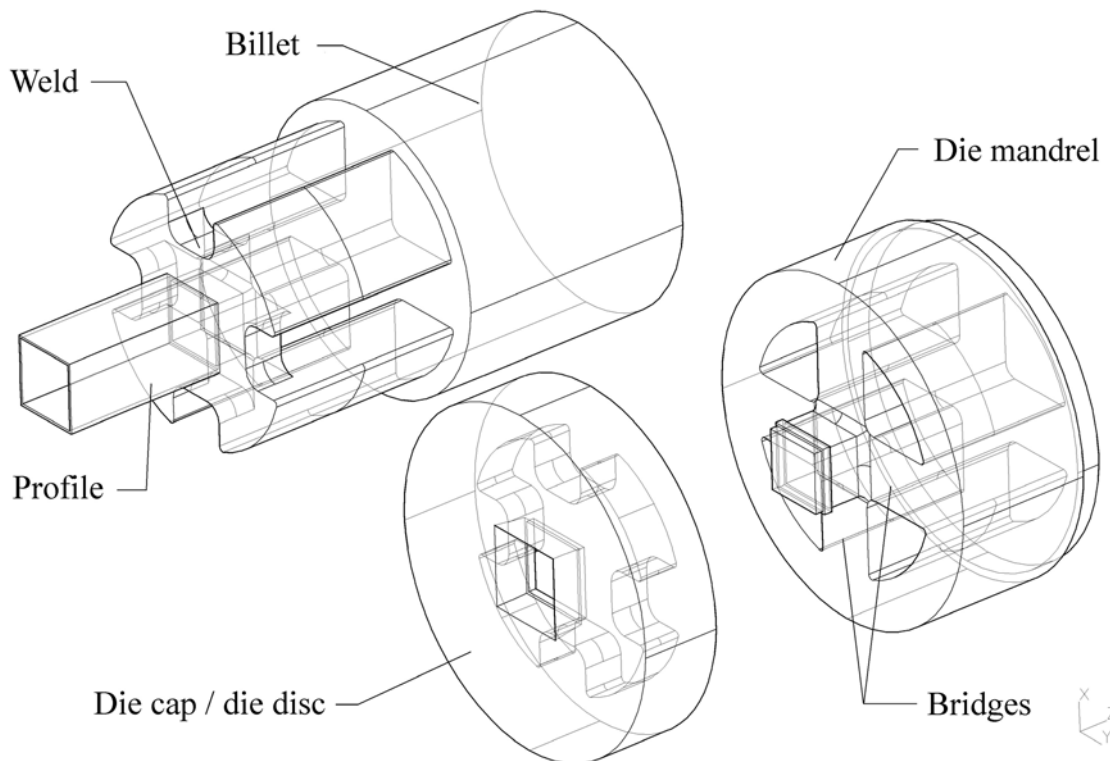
The principle of hollow profile extrusion. The die cap (die disc), the die mandrel and the partly extruded aluminium billet/profile are shown.
